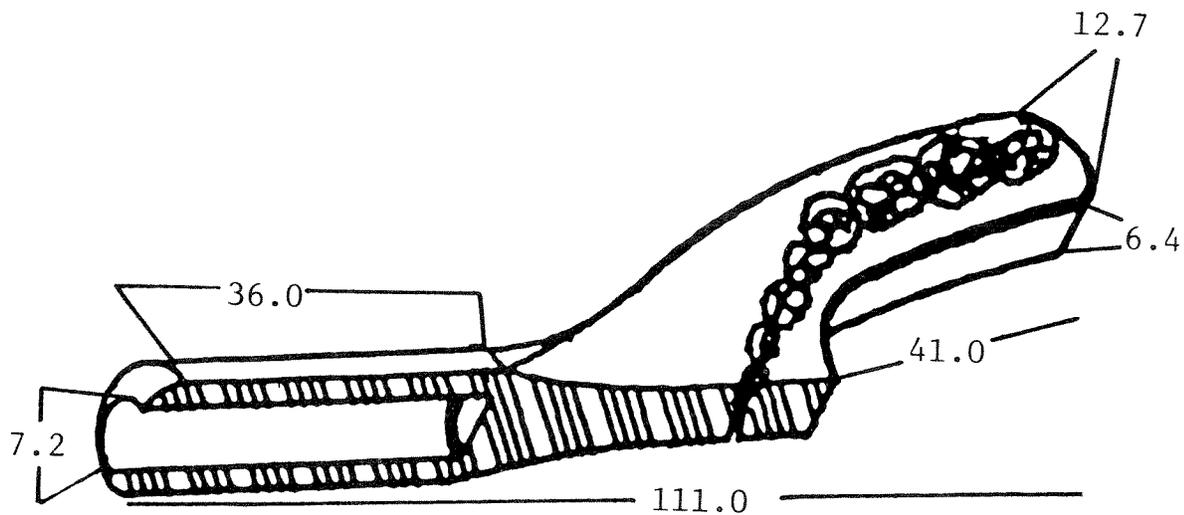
Drawing showing a cross-section of the mouthpiece. All dimensions are in millimeters.
